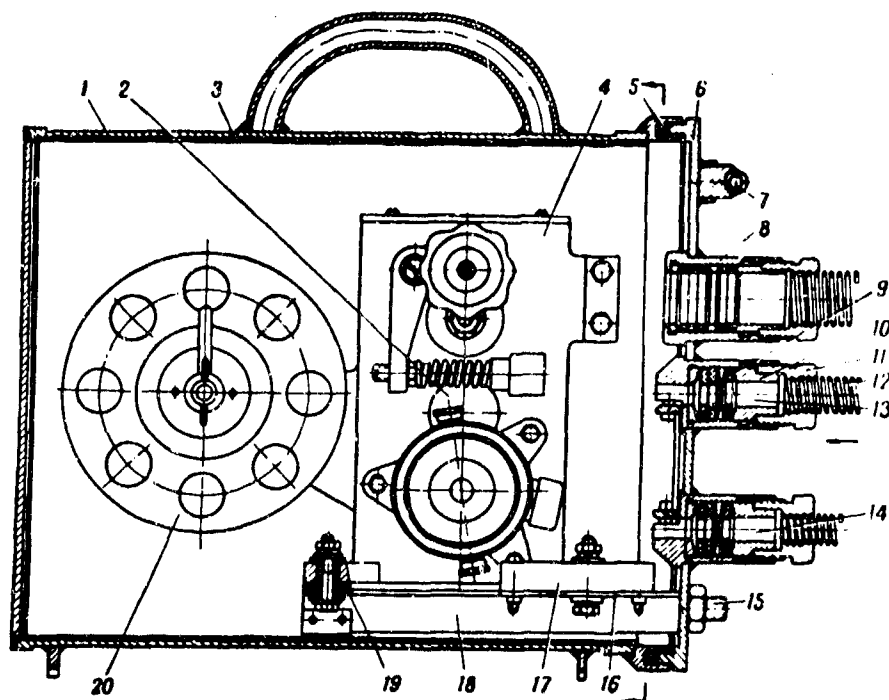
Mechanism for Supplying the Electrode Wire of the Semiautomatic Machine: 1 - housing (container); 2 - feeding unit; 3 - insulating sheet; 4 - reducing valve; 5 - rubber gasket; 6 - housing cover; 7 - oxygen adapter; 8 - inlet for welding cable; 9 - packing disks; 10 - bushing; 11 - pressure nut; 12 - helix made of stainless steel; 13 - outlet for hose-cable; 14 - inlet for control cable; 15 - coupling bolt; 16 - base; 17 - contact clamp for welding cable; 18 - slide with finishing; 19 - unit for attaching feed mechanism to base; and 20 - cassette (box) for electrode wire.
